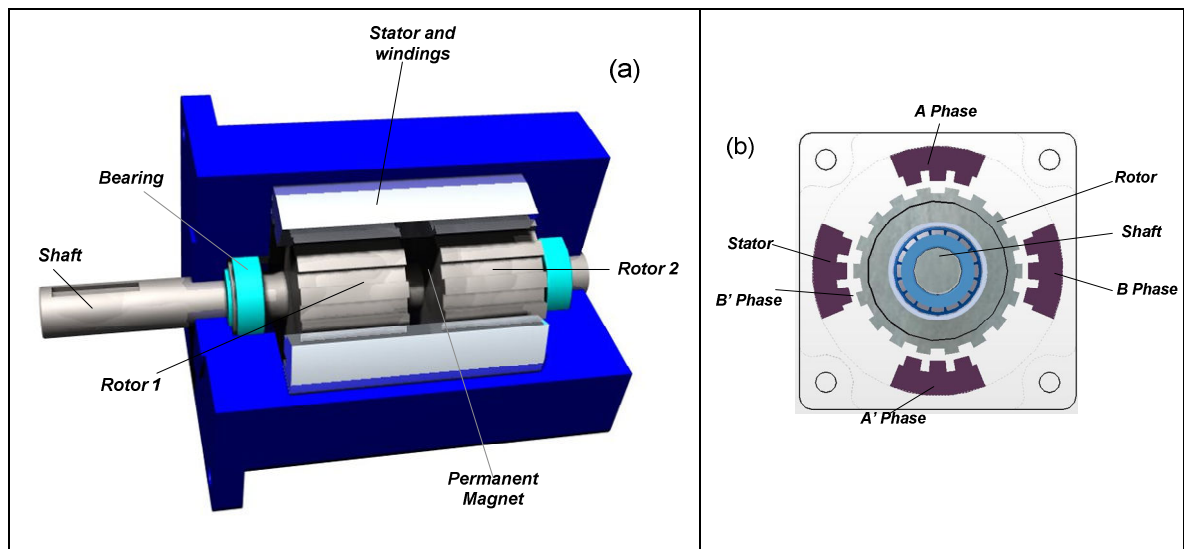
Basic structure of step motor (a) Half section parallel to shaft (b) Full section perpendicular to the shaft
